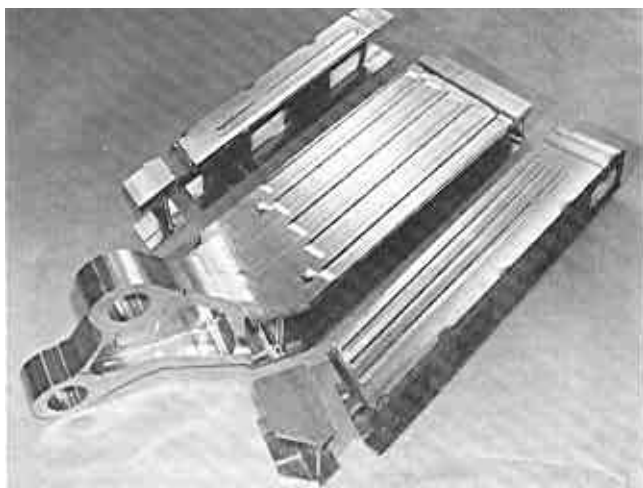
Main wing attachment on Mirage F1 in rough machined condition ready for TIG welding.
